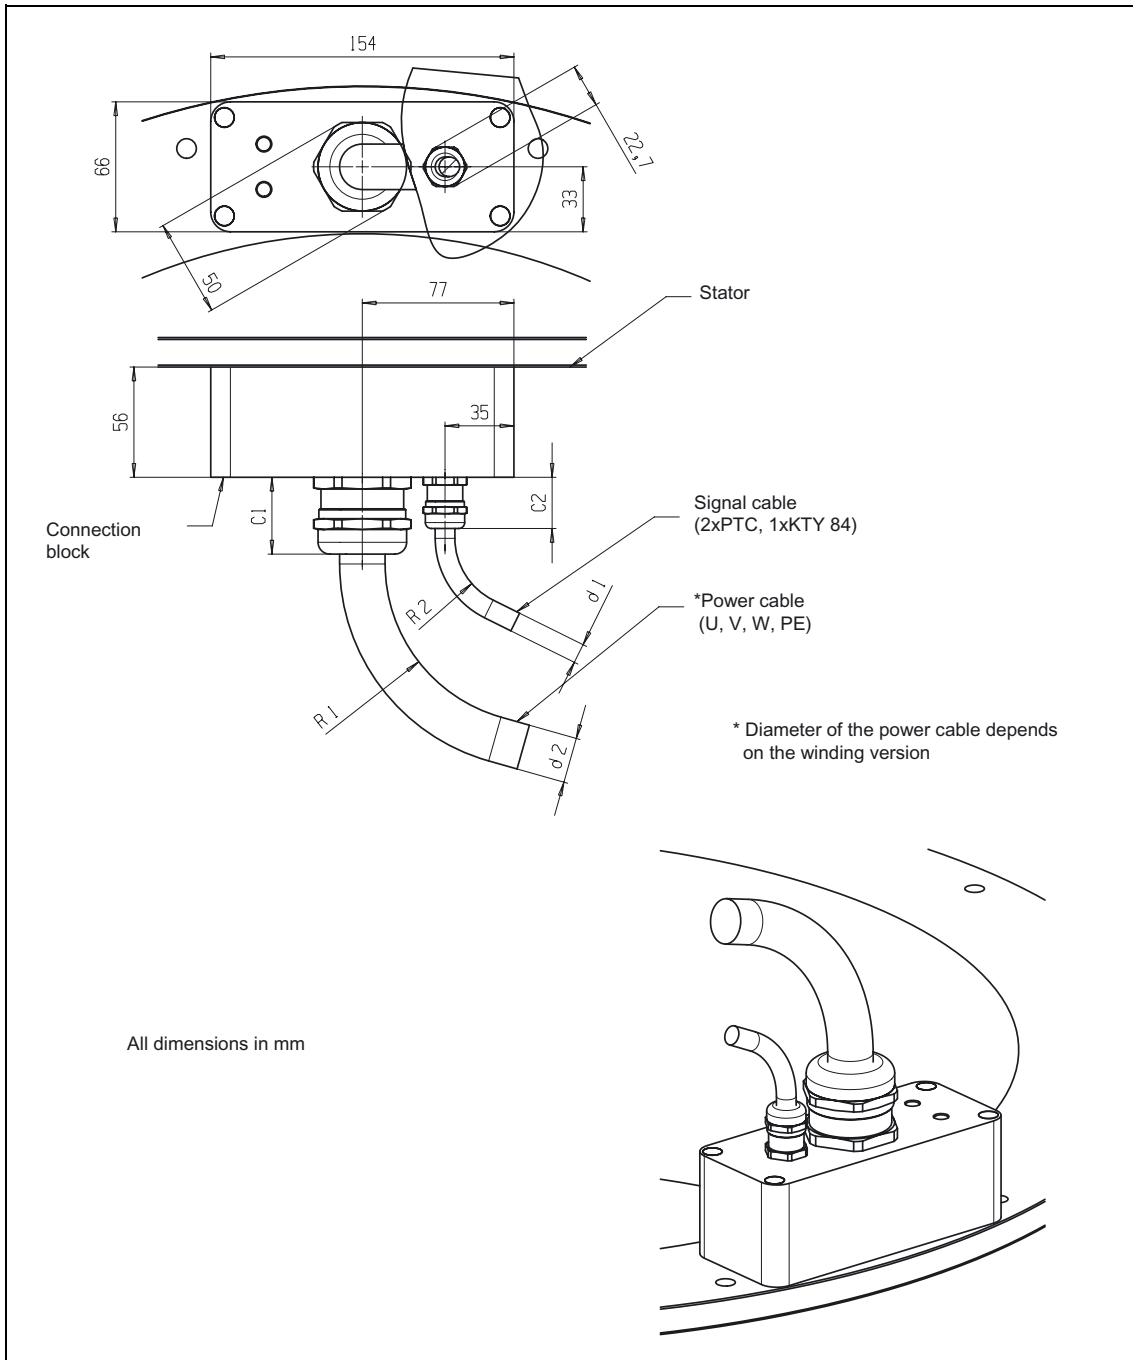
Axial electrical connection with gland for 1FW6290 (motor type A)
